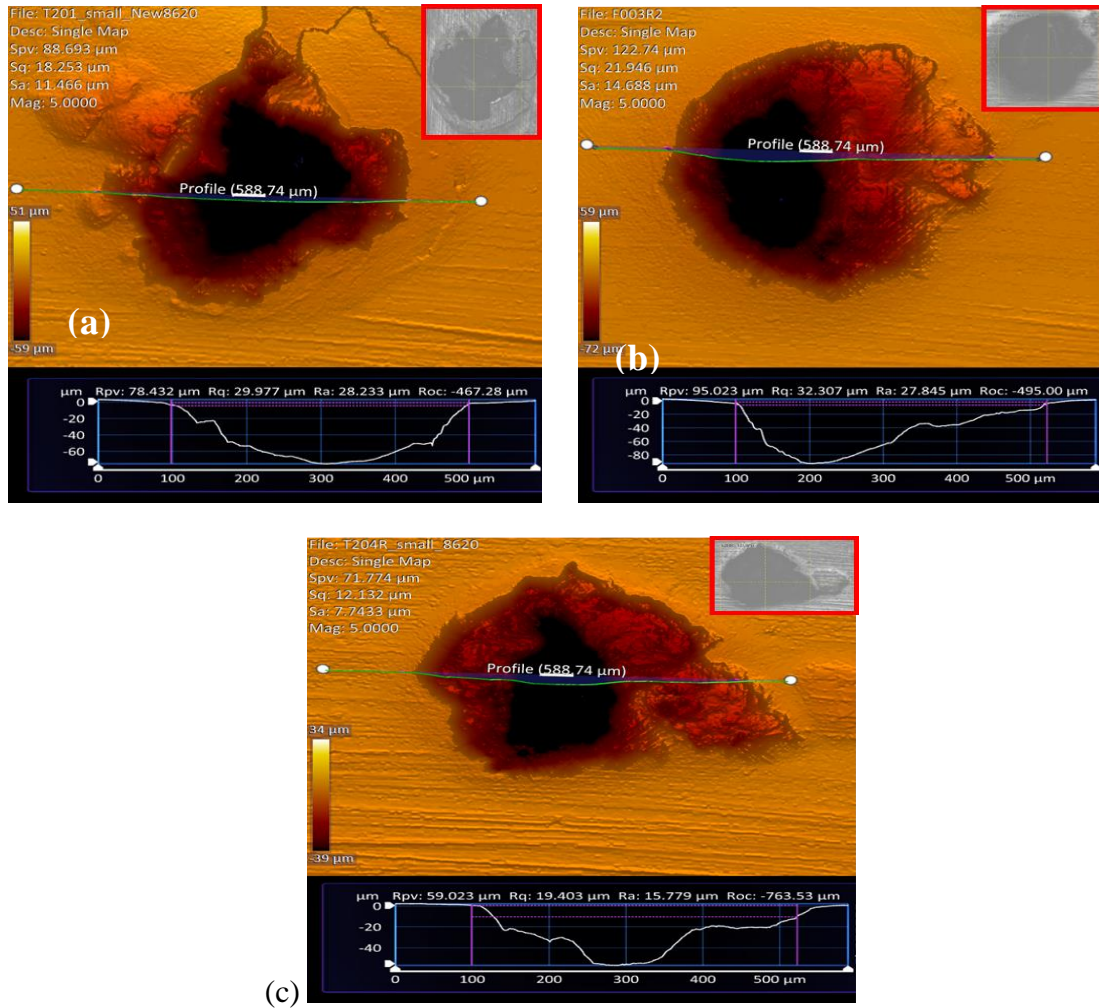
Spall shape of a specimen: (a) pristine case carburized steel, (b) refurbished case carburized steel with grinding depth of 25 μm , (c) refurbished case carburized steel with grinding depth of 241 μm
